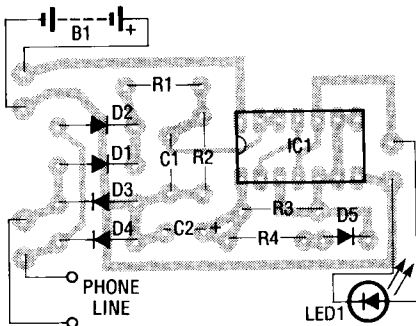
THE PARTS PLACEMENT DIAGRAM of the Phone Sentry. You can mount LED1 in several ways, depending on how you mount the PC board.
